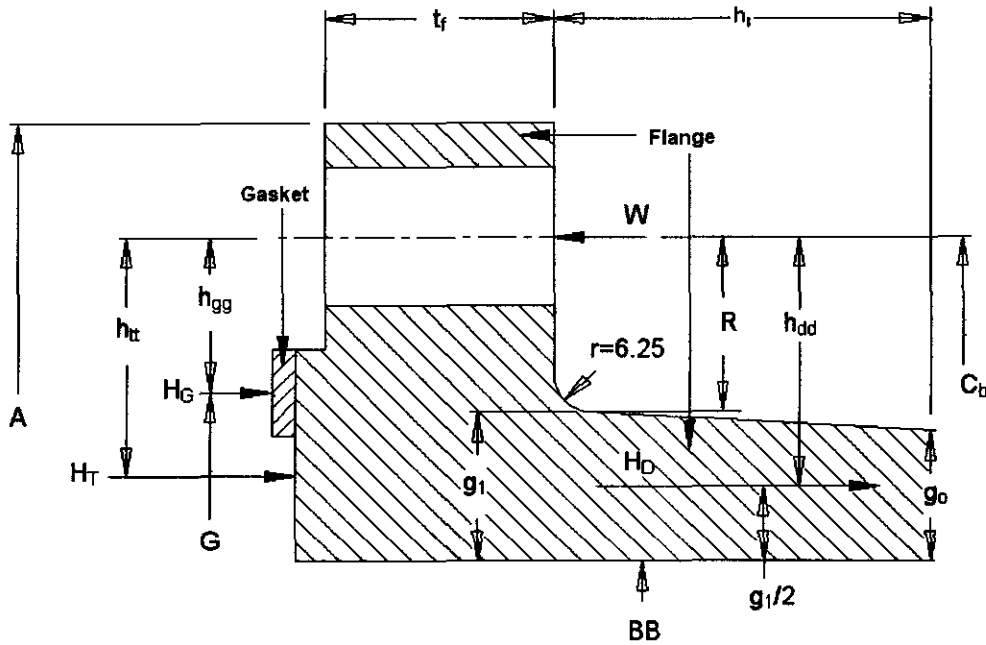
ASME VIII Appendix 2 sectioned flange (Appendix 7: drawing FL_APP2)
